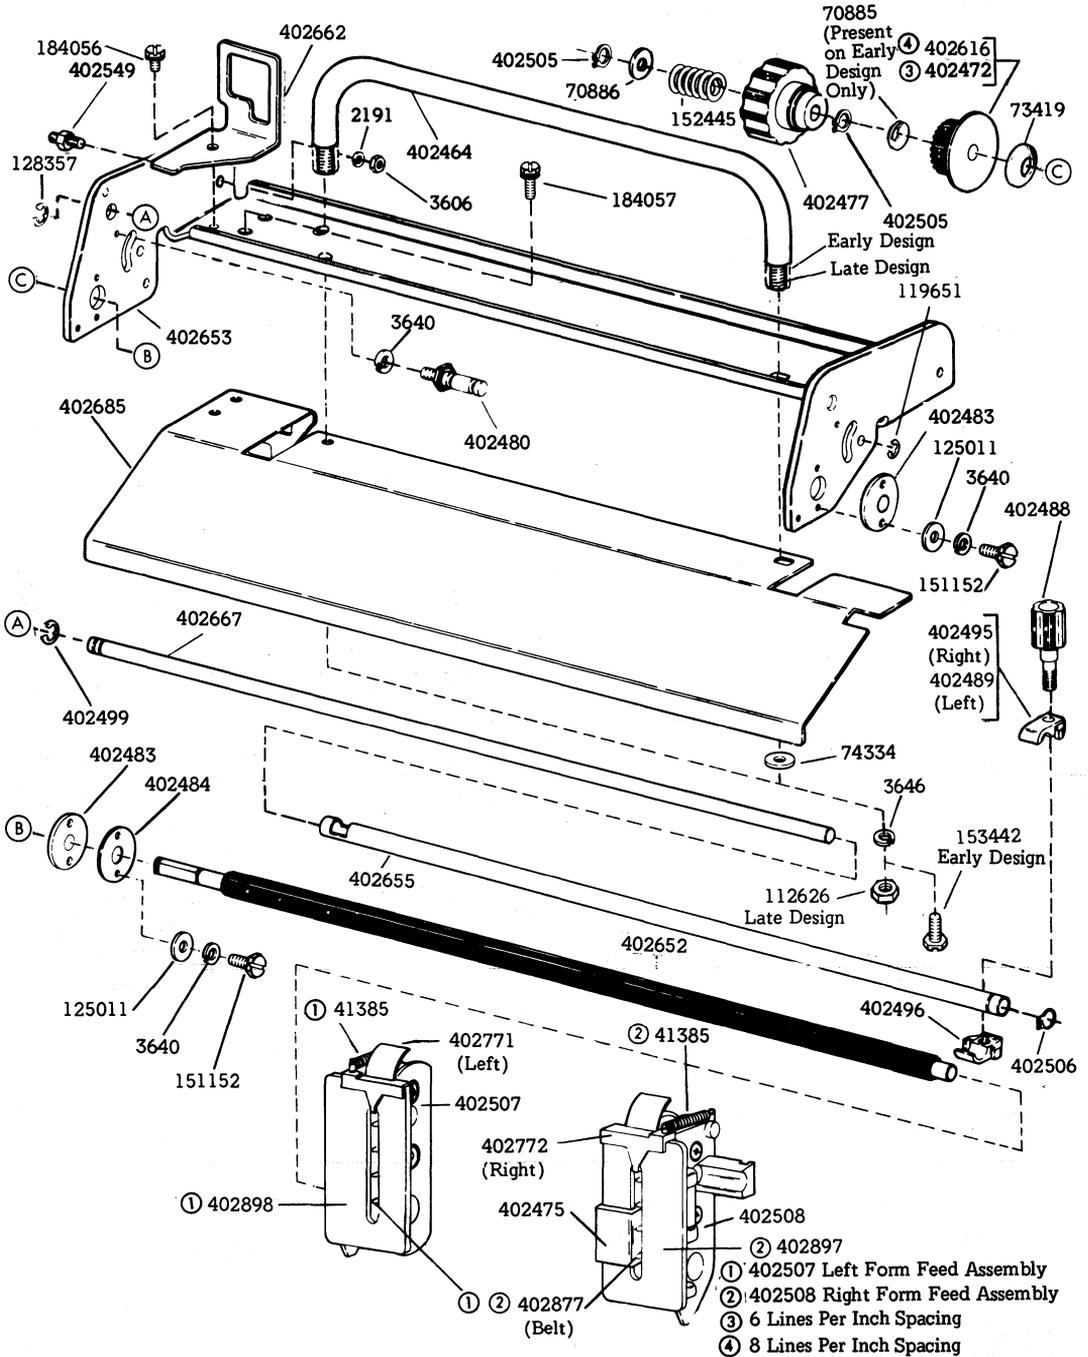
Paper Handling Assembly (Tractor Feed - 132-Column)
